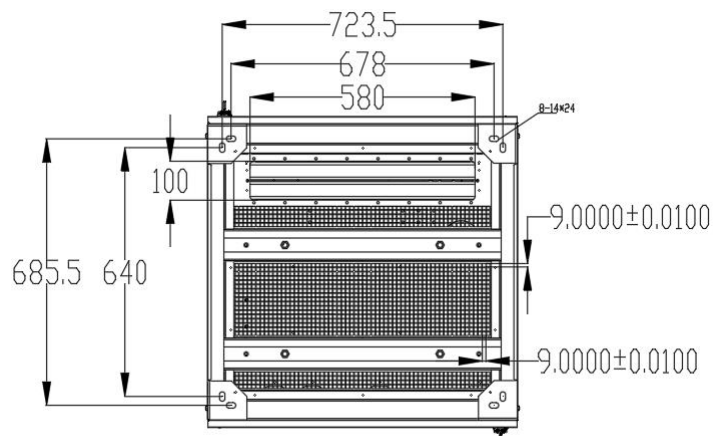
PWG2-50K rack wiring hole in bottom view
